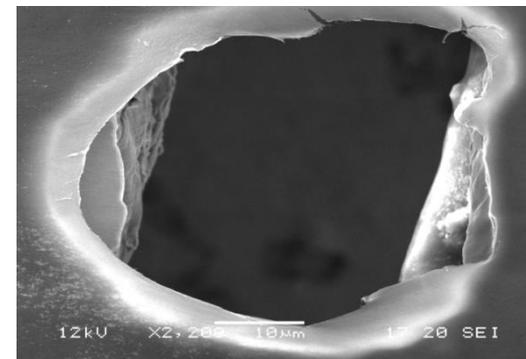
The melted hole caused by a electrical discharge during the regular IR or WV test because of a shorter distance between electrodes. However this defective DUT can easily pass the general regular WV/IR tests and goes to the end users.
